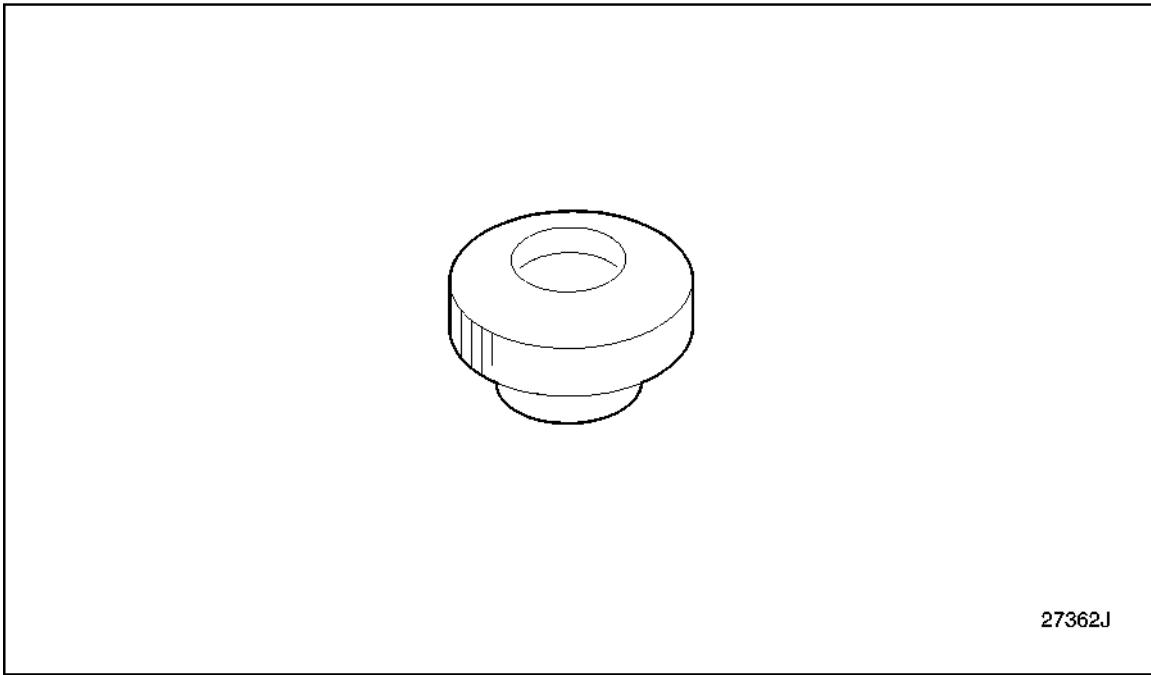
Valve Seat Grinding Wheel 21 Degree,J 41535
